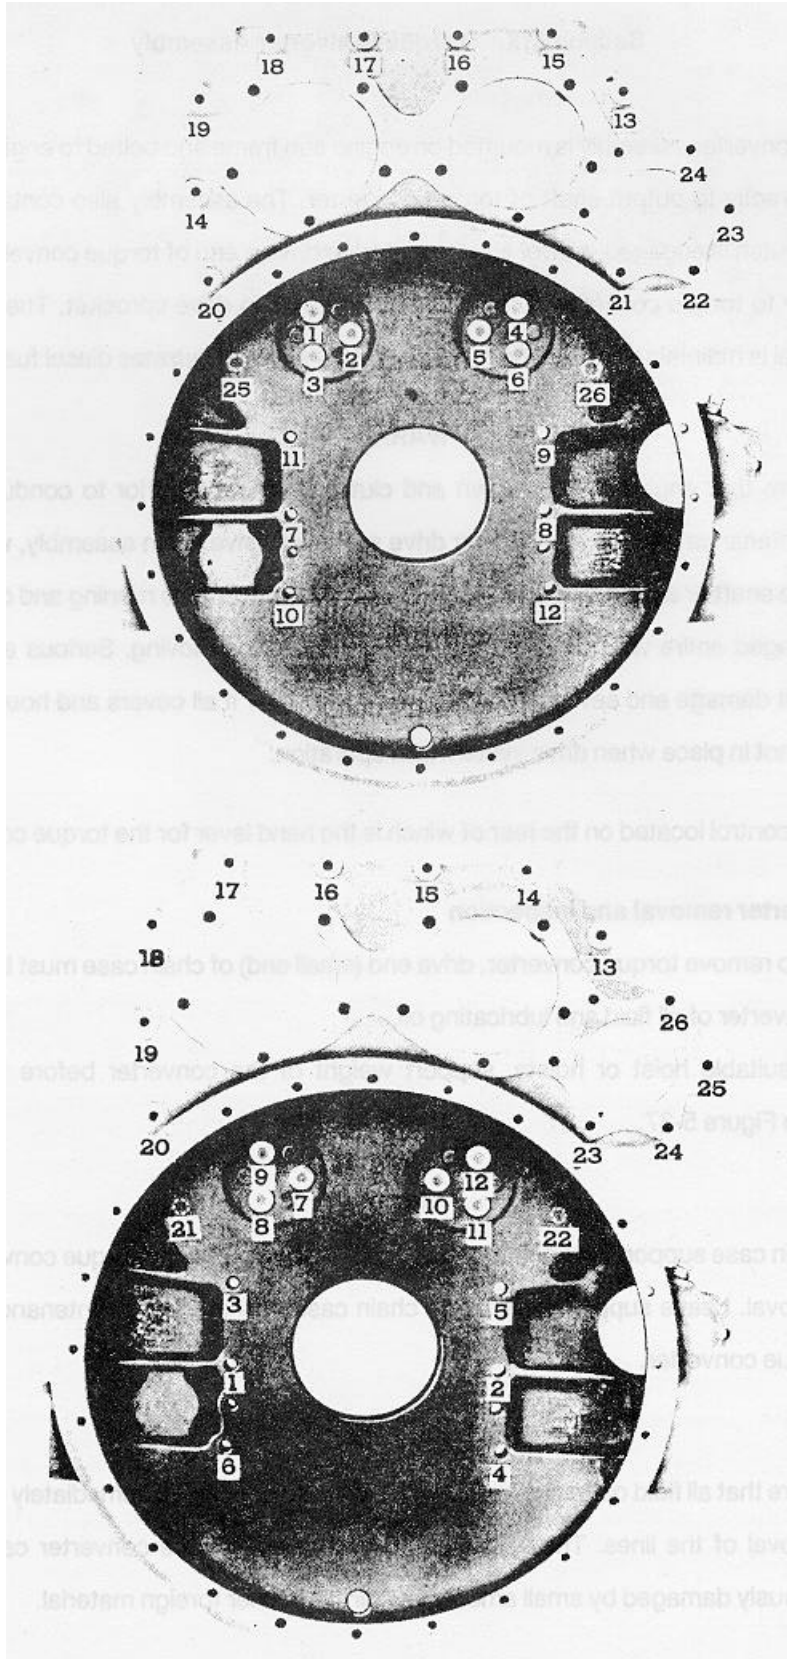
Flywheel Housing Bolt Tightening Sequence.
